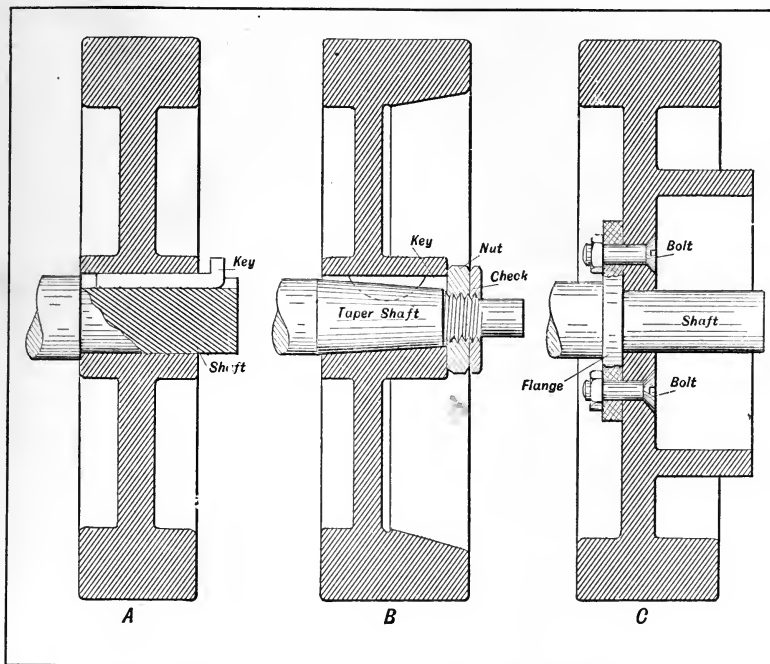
Outlining Methods of Fly-wheel Retention Commonly Used. A—By Gib Key. B—By Woodruff Key, Taper and Clamp Nut. C—By Bolting to Flange Forged Integrally with Crank Shaft.
